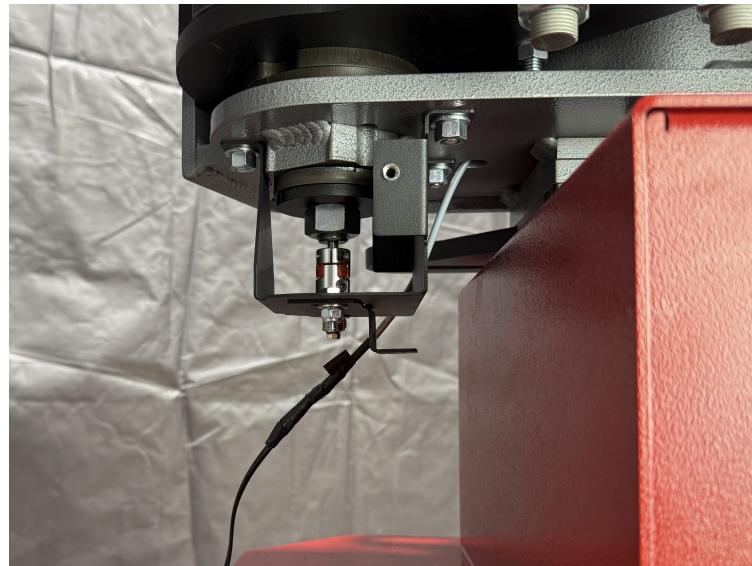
Pull the new encoder cable through the frame using the old encoder cable as a guide.
